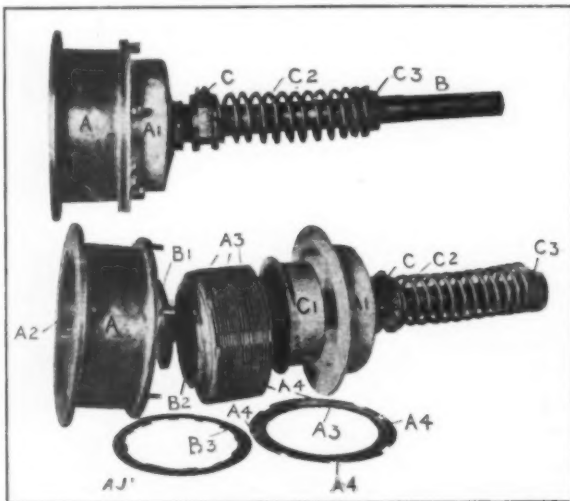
THE FIAT DISK-CLUTCH, COMPLETE AND IN PARTS.
